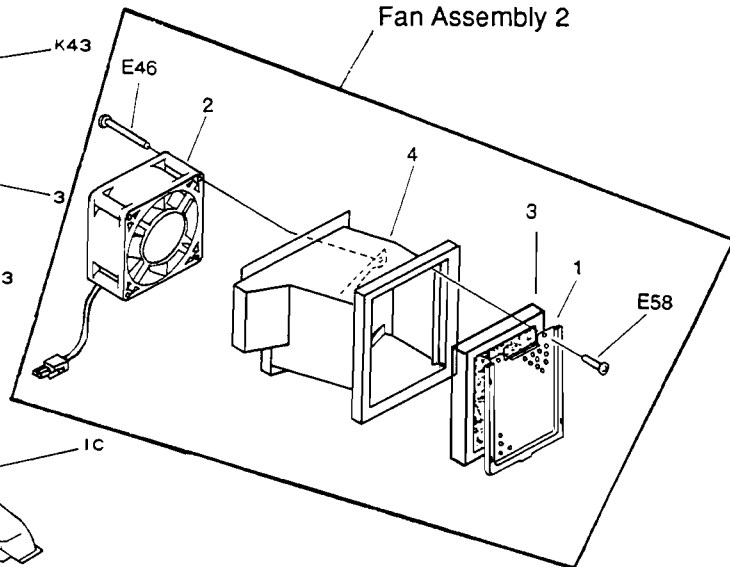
14. Corona Filter Intake Fan Assemblies 1 & 2
